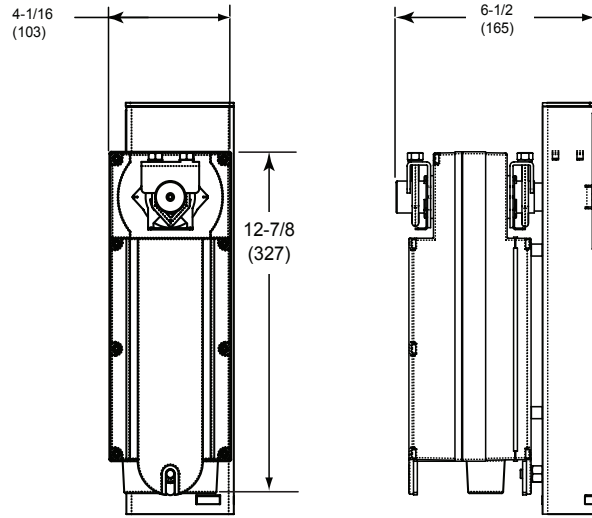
Mx41-634x-230 Actuator/Linkage Assembly
